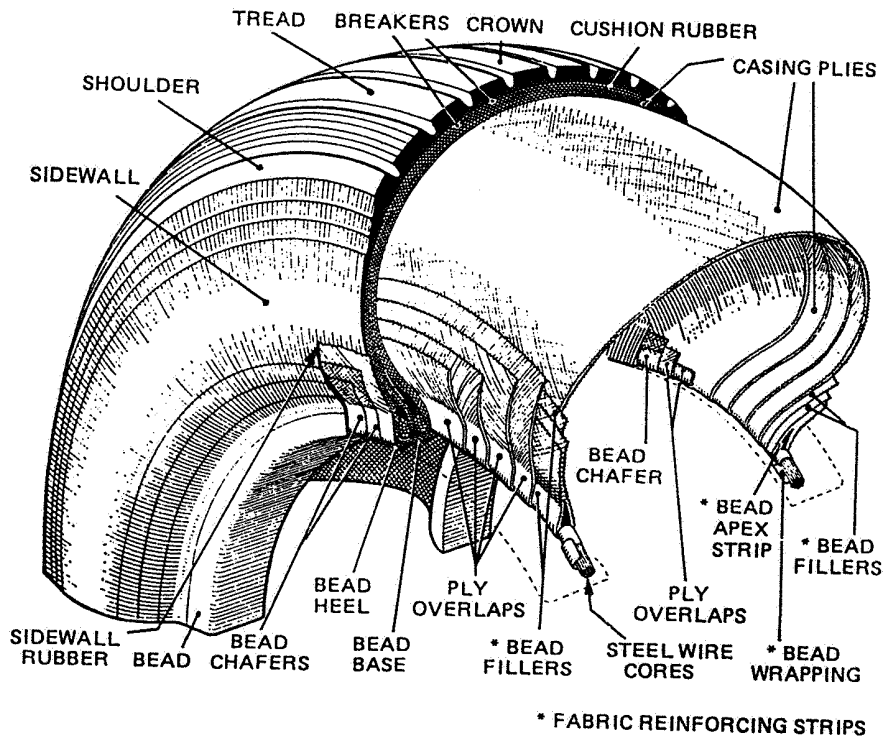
CONSTRUCTION OF TYPICAL TUBED TYRE
